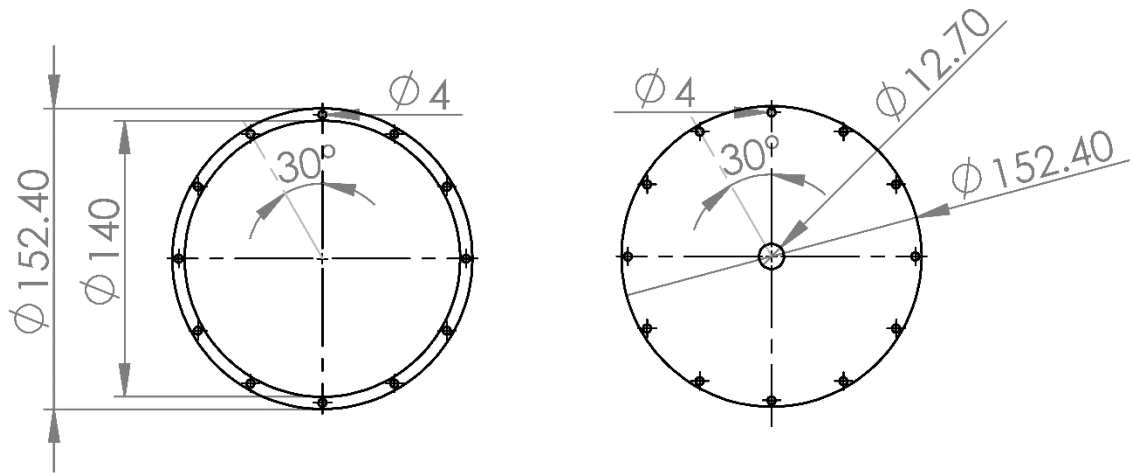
Laser cutting layout of the acrylic front flange and backing plate of the vacuum cylinder (unit: mm)
